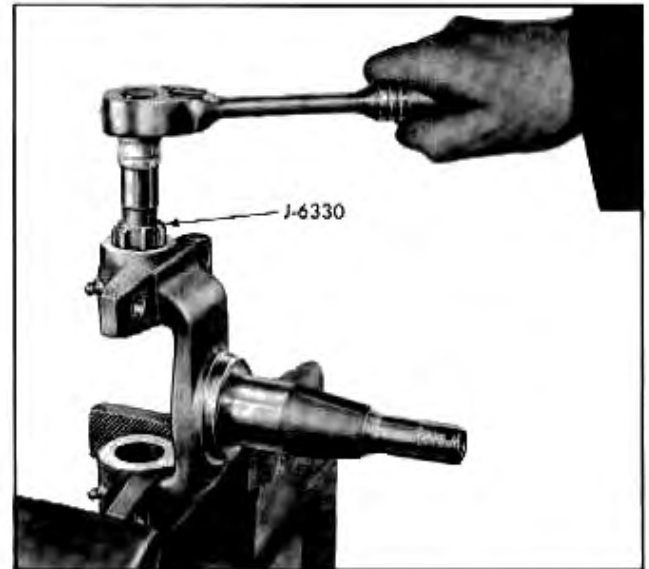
Reaming Steering Knuckle with Reamer J-6330
